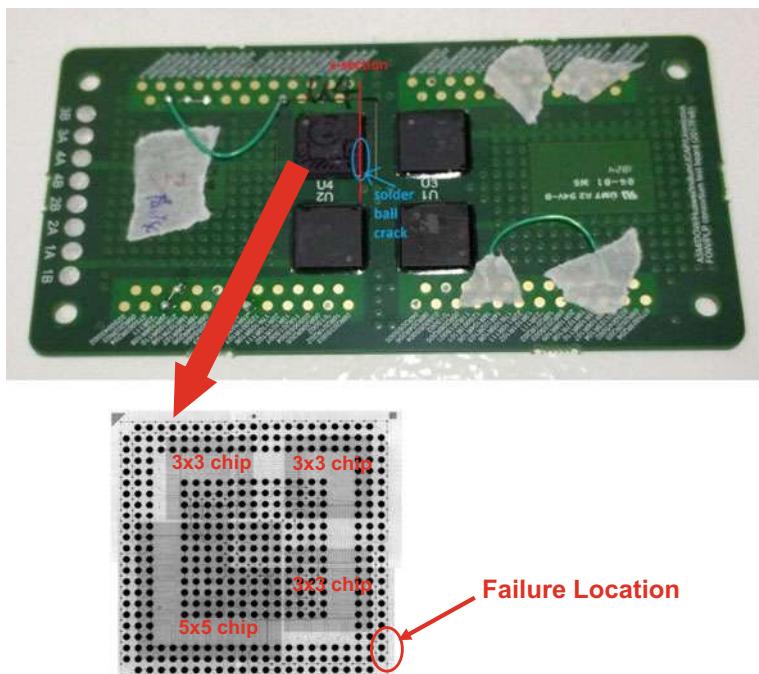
Failure location of the PCB assembly of the heterogeneous integration under drop test
